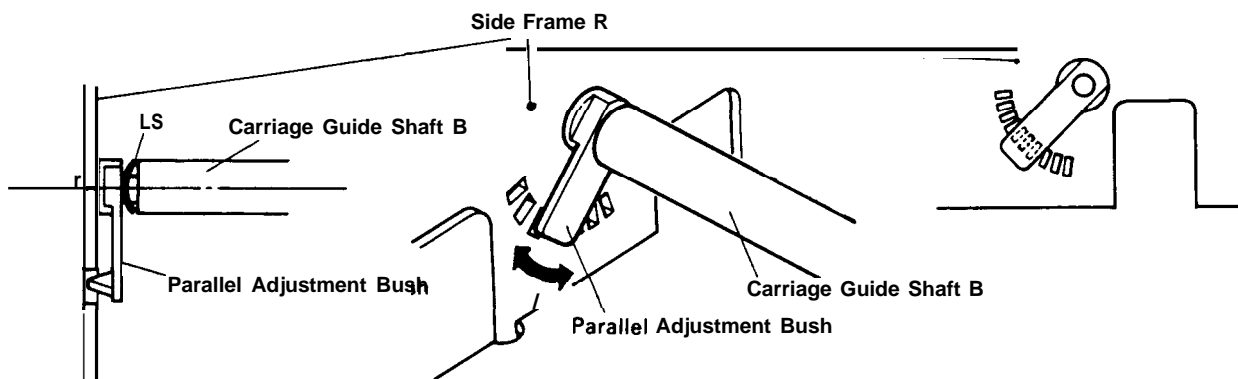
LS and Parallel Adjustment Bush Removal
